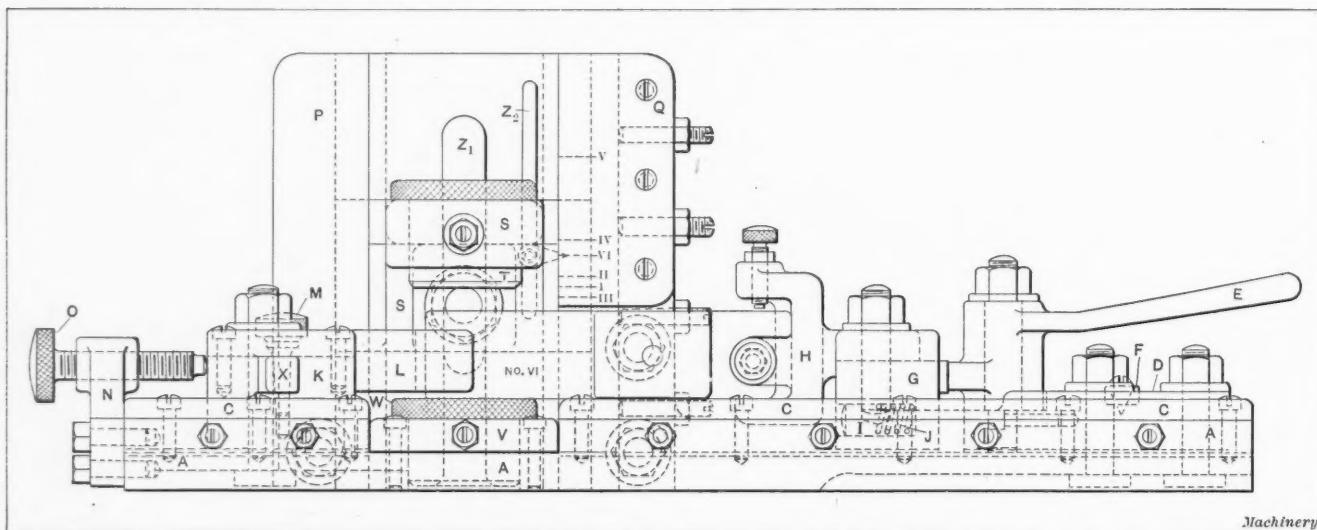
Front View of the Jig showing Bushings and Drill Guide Supports
